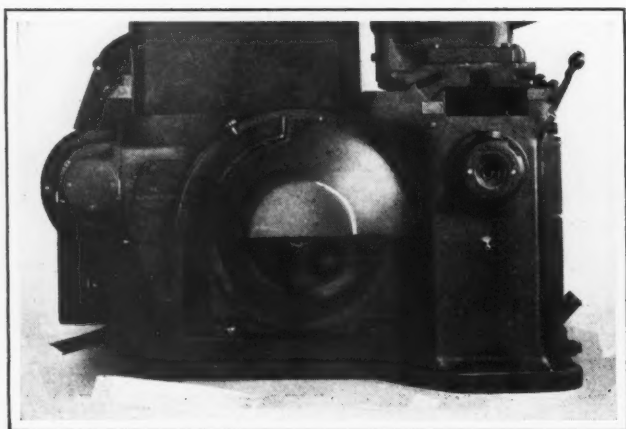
Hooded Housing which Encloses the Motor of Motor-driven Machines
